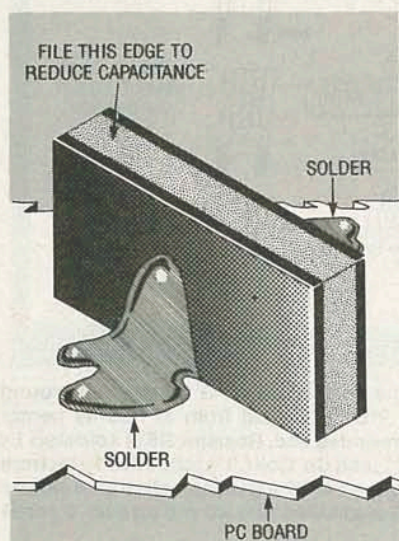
TO MAKE C10, take a small square of G-10, 0.062-inch PC board material and trim it to a $\frac{3}{16}$ -inch square. Install it on the solder side of the board in the location shown in Fig. 6.
